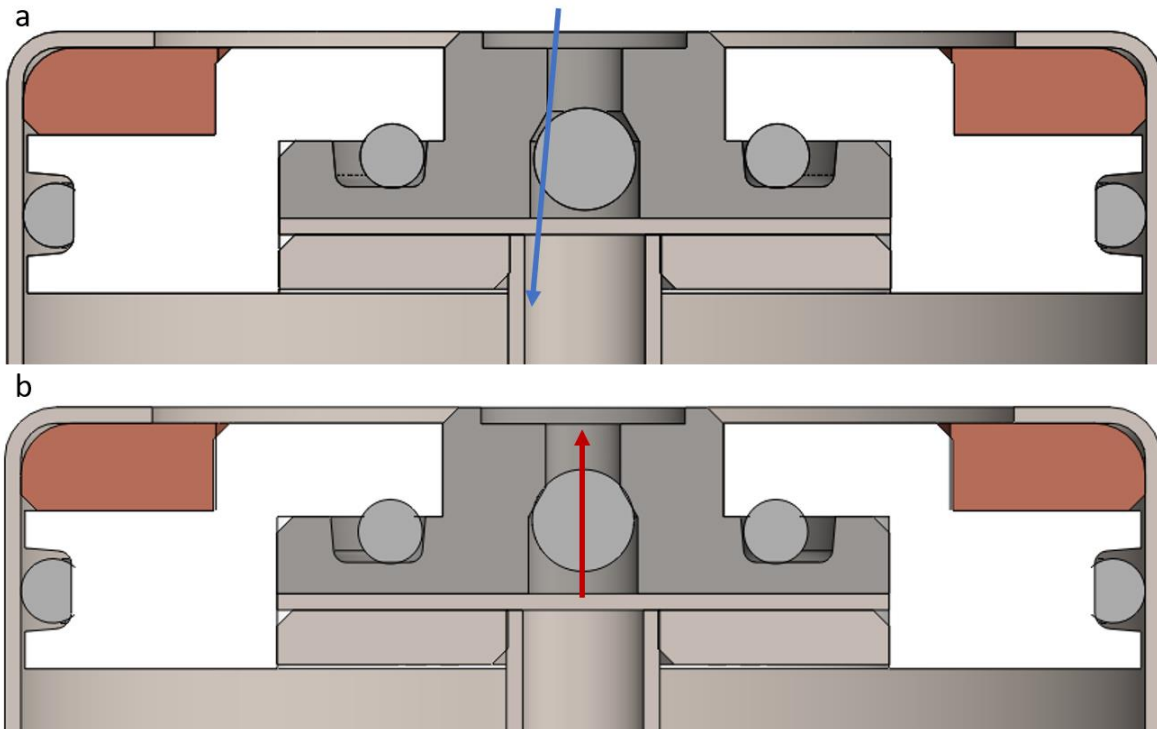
The cross-sectional views of one possible embodiment of the mechanical constructions of a cell cap.
